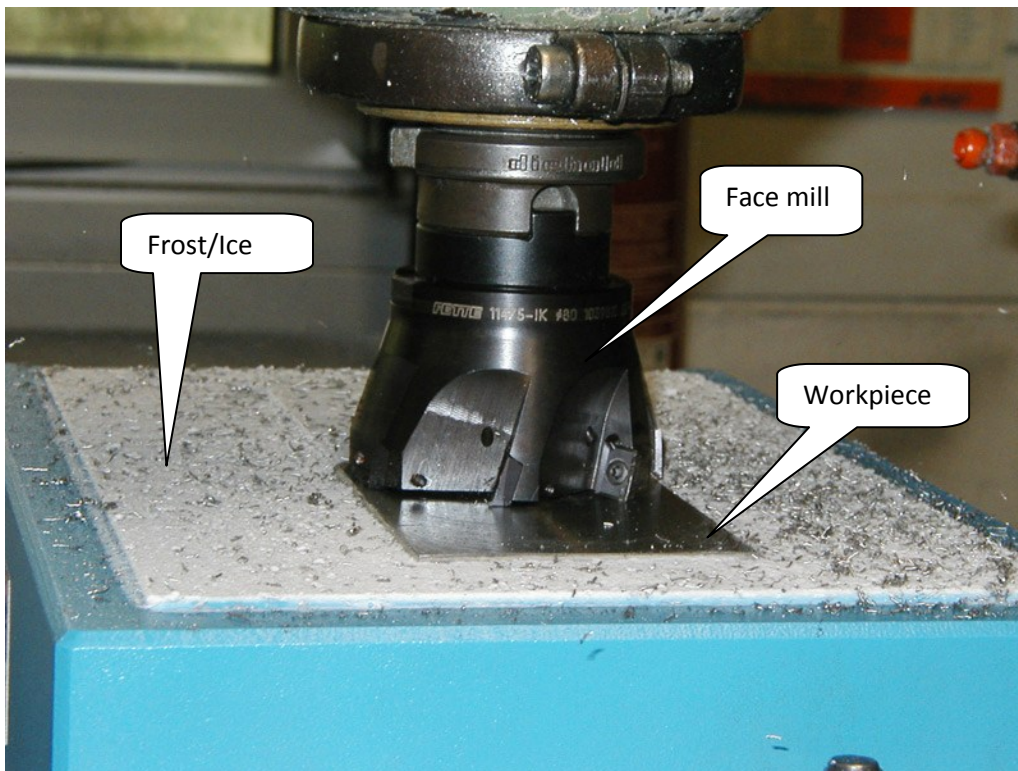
Ice fixture holding part being face milled. The ice layer is almost invisibly thin, but frost covers the cooled area (Horst Witte, 2010)
